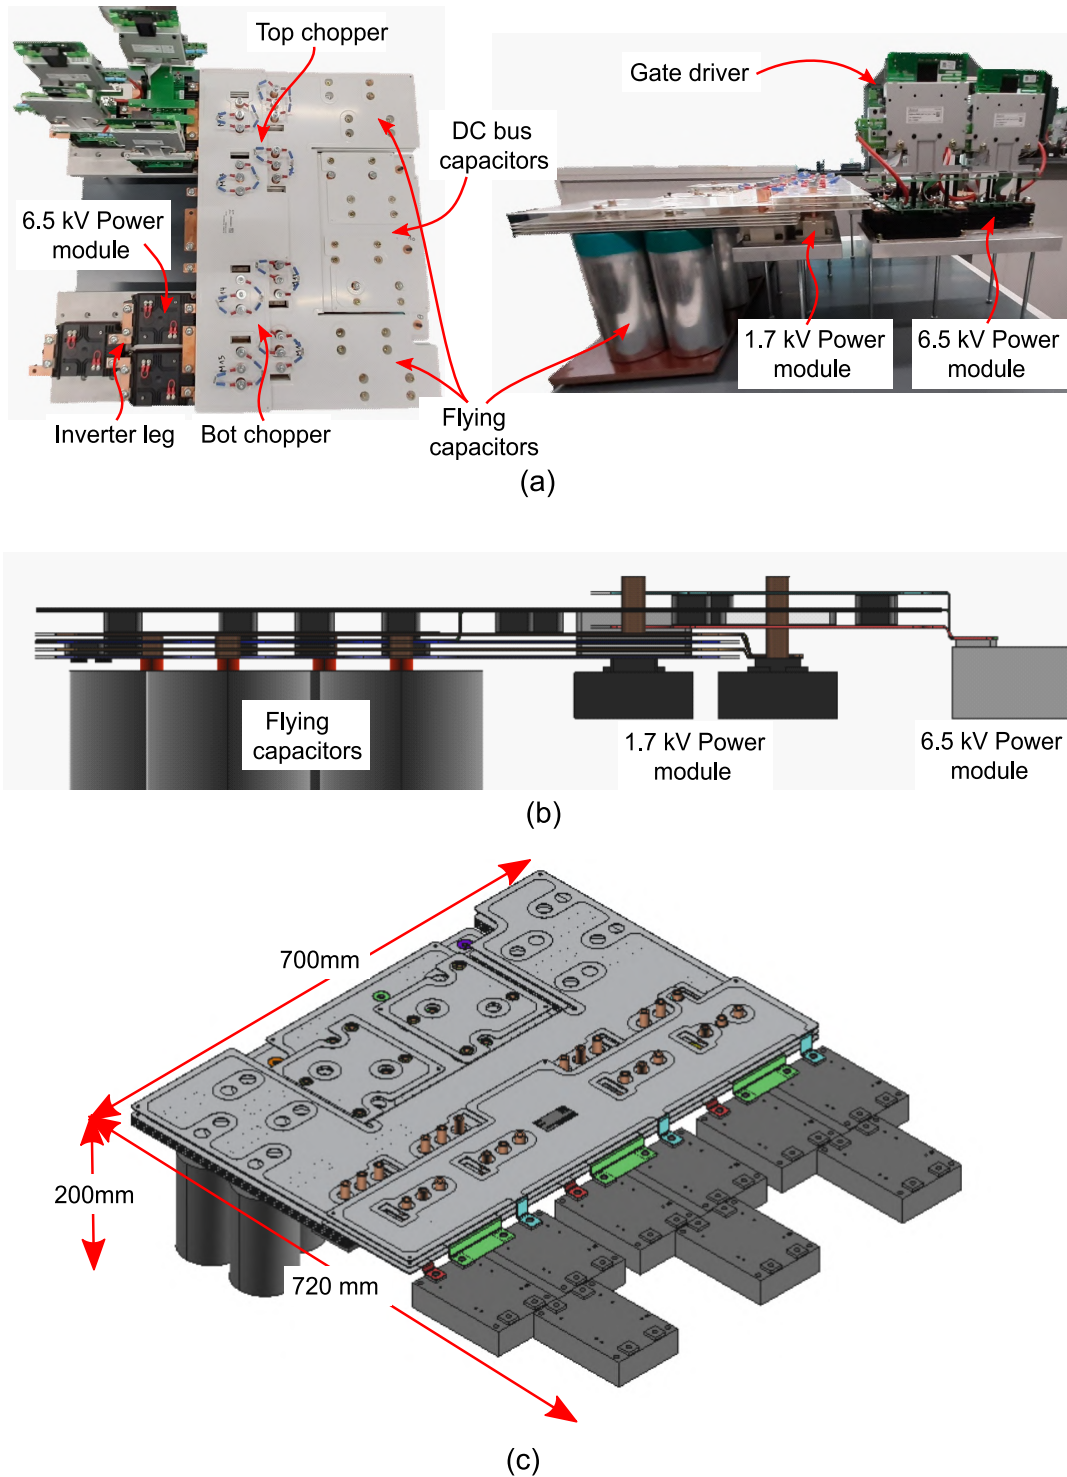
4.16 kV/700 kVA inverter: (a) busbar with the mounted inverter components; (b) 3D side view of the laminated busbar; (c) 3D view of the inverter with its dimensions.
